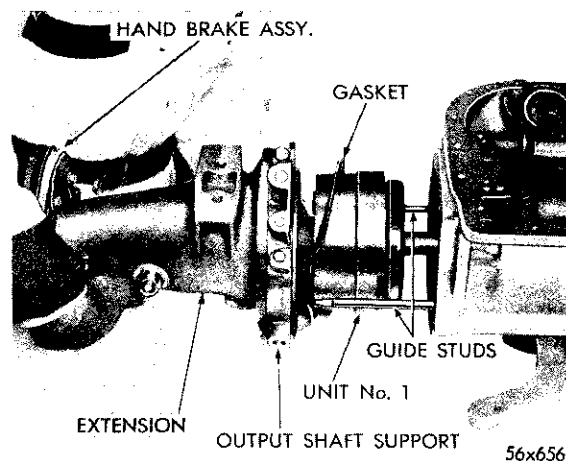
Removal of Output Shaft Support, Extension, Handbrake Assembly and Unit No. 1 as an Assembly
